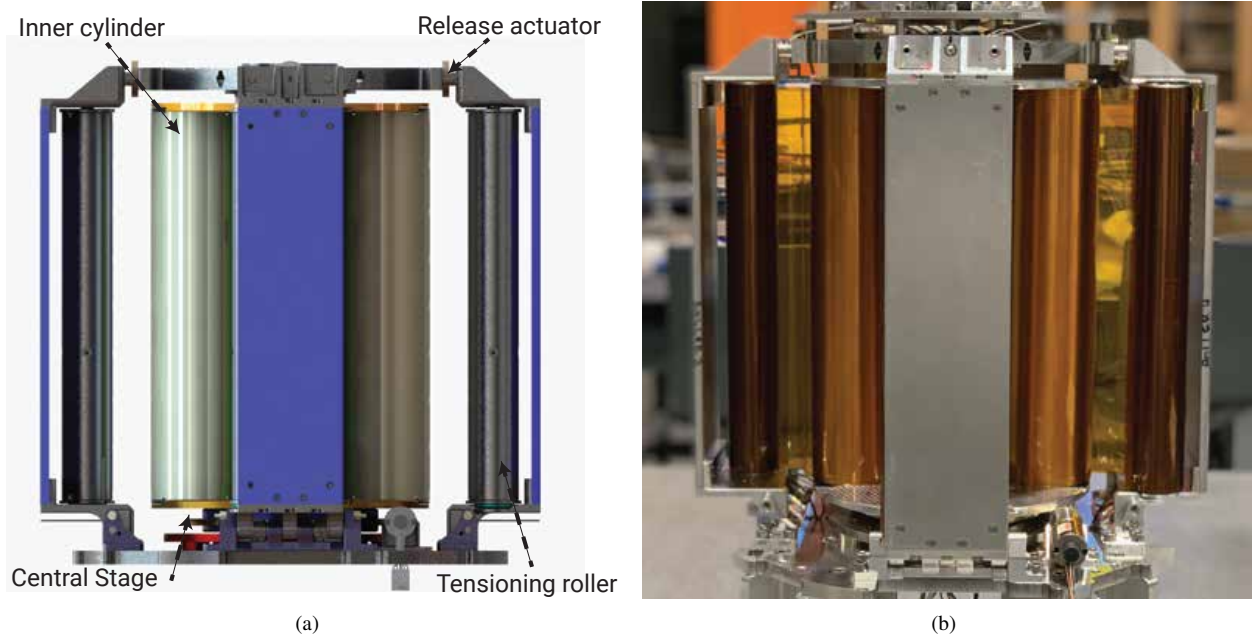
(a) CAD render of EM deployment mechanism; (b) assembled DOLCE EM mechanism
